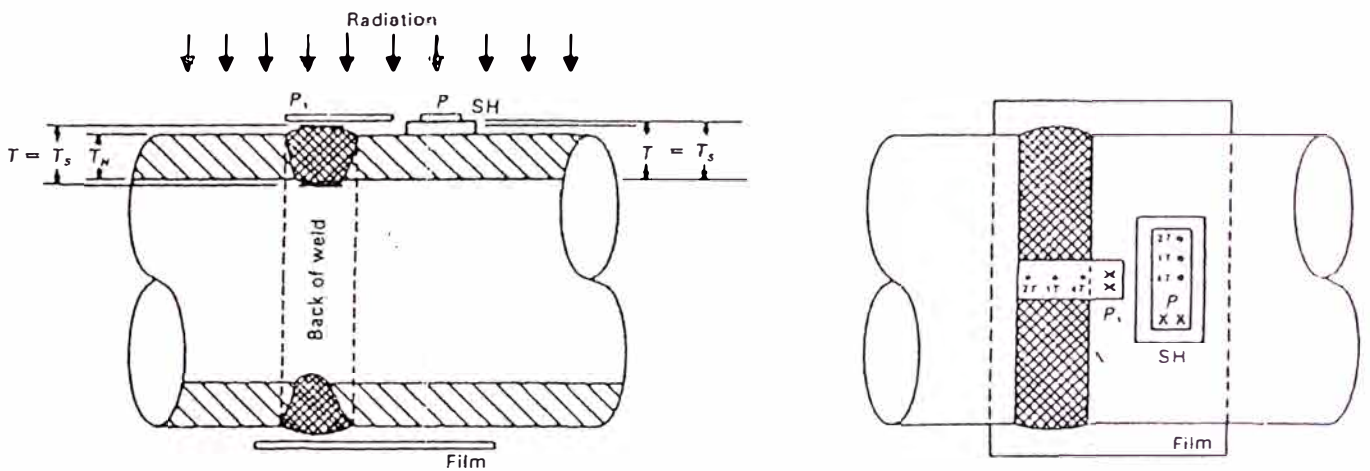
SIDE AND TOP VIEWS OF HOLE-TYPE IQI PLACEMENTS
